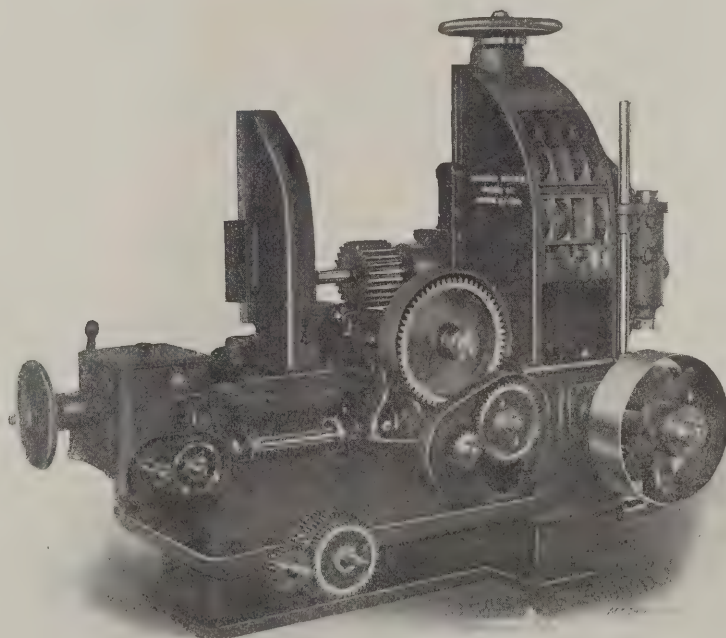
Automatic Pinion Cutting Machine. Rear View.
